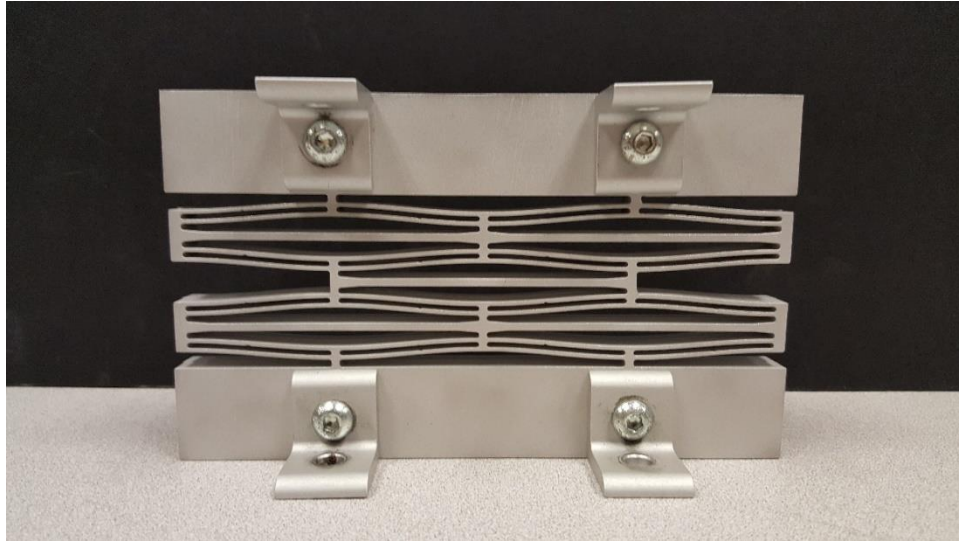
Aluminum 2.5D honeycomb showing the 80/20 angle brackets used to support the design
